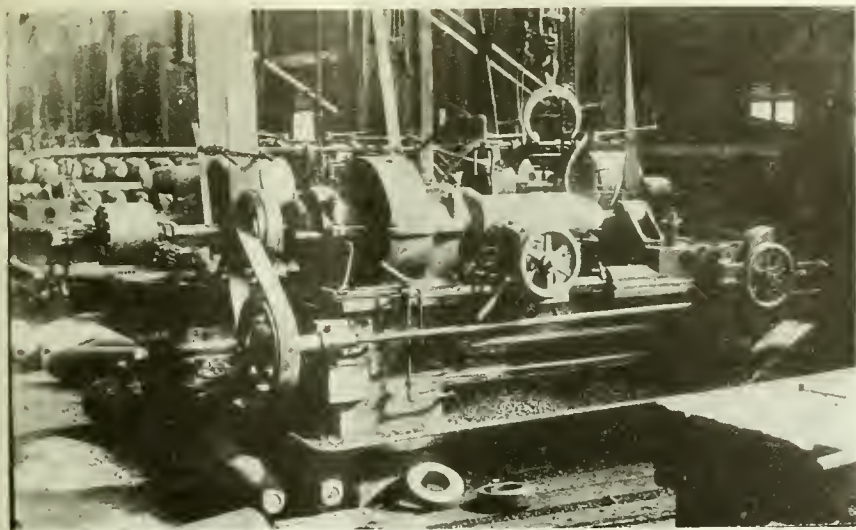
CUTTING OFF OPEN END AND DRILLING NOSE—SPECIAL SHELL MACHINES
